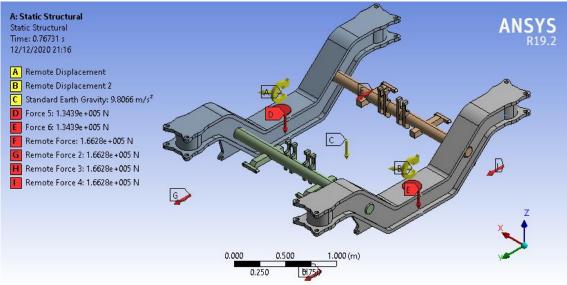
Boundary and longitudinal shunting loads for structure steel S235, view 2.
